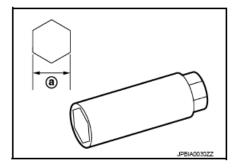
Identifying Spark Plug Wrench Dimension Courtesy of NISSAN NORTH AMERICA, INC.
